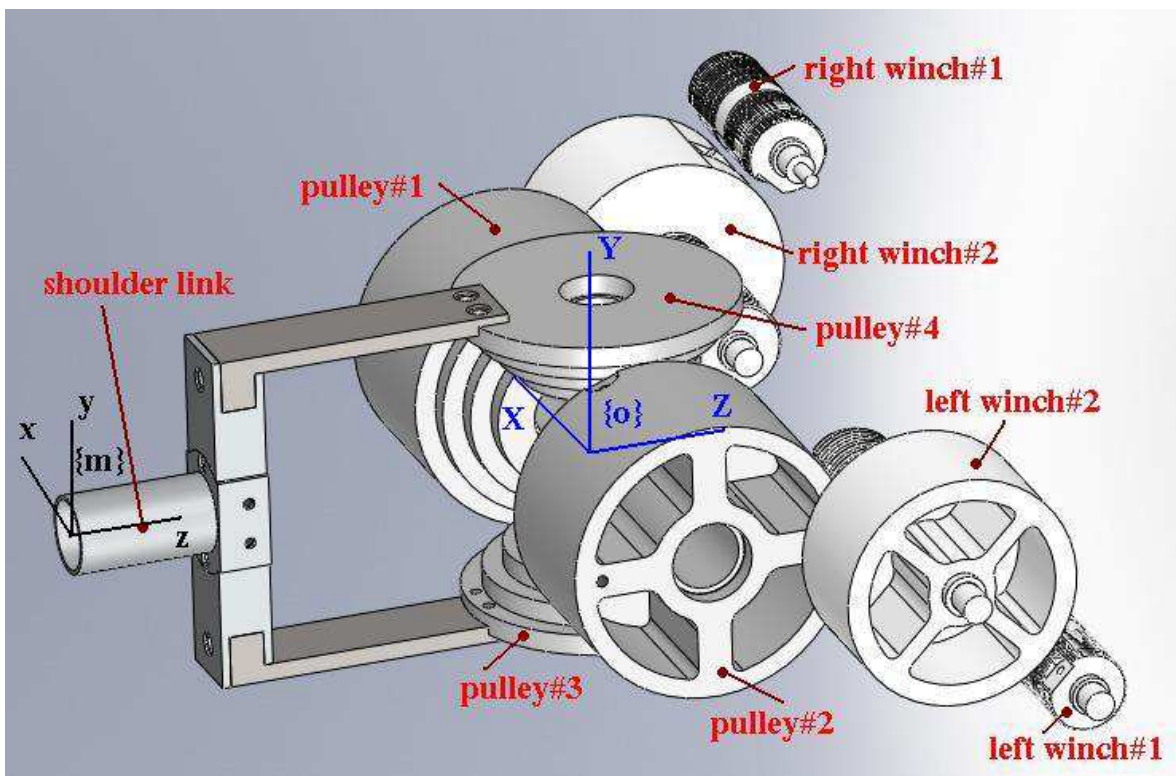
Winches and pulleys arrangement in the drivetrain unit of the flexible joint robot.
